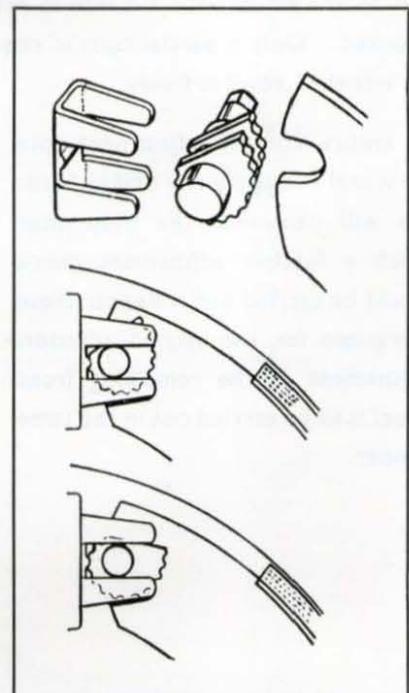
The component parts of the "Micram" Adjuster, squared rod type
